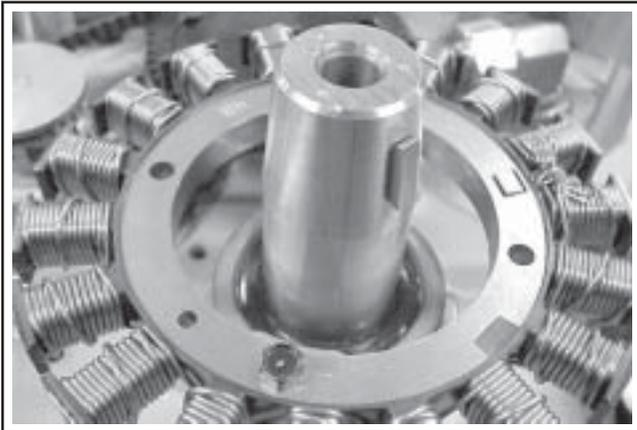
Installing Key in Flywheel End of Crankshaft.
